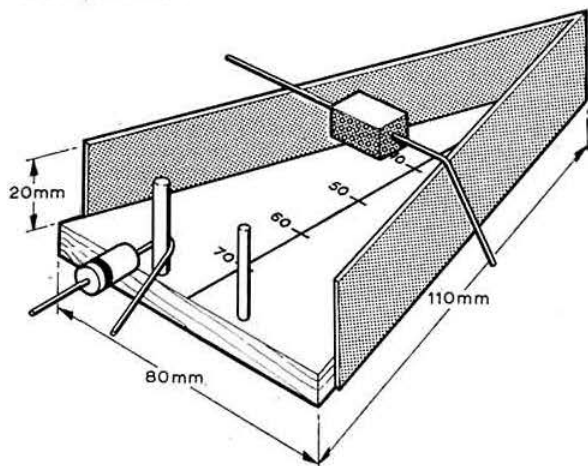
Simple jig for shaping component leads before fitting to printed-circuit boards. Dimensions in millimetres
